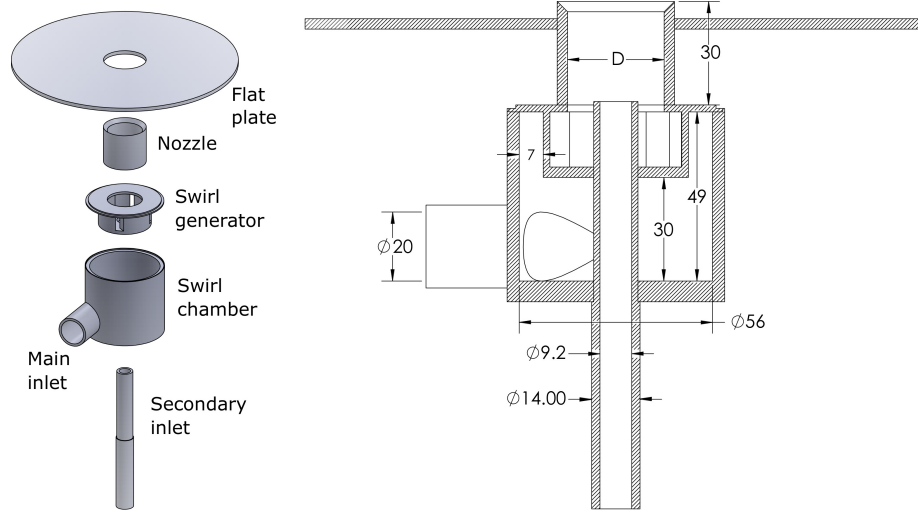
Exploded view of modular swirl burner (left) and cross-section view (right). Dimensions in millimetres.
